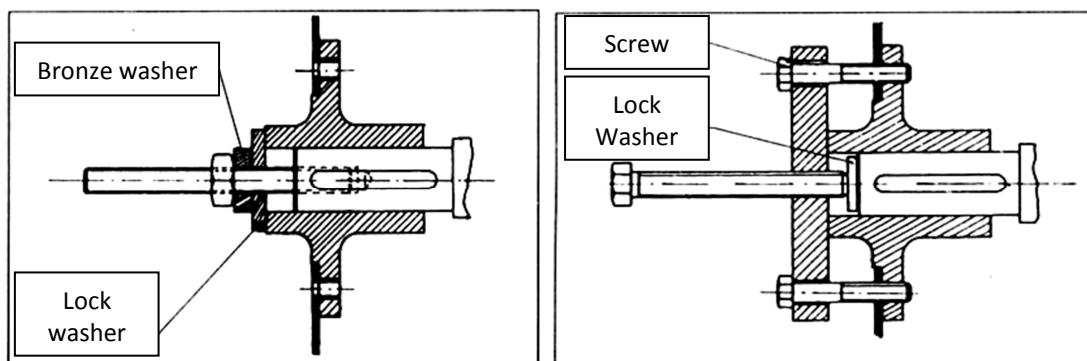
(a) Scheme for mounting the impeller of a fan;
